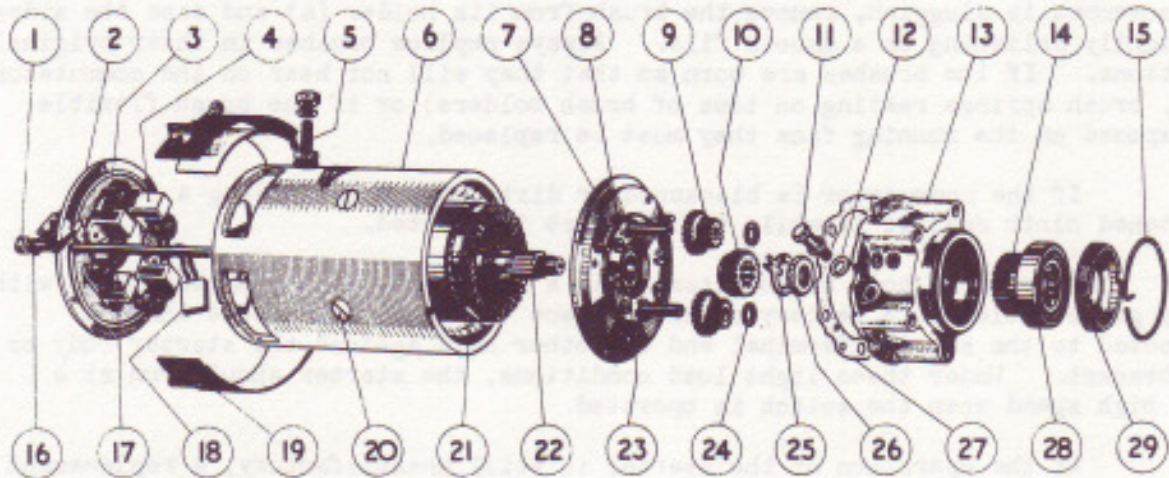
"EXPLODED" VIEW OF STARTER MOTOR & REDUCTION GEAR.
